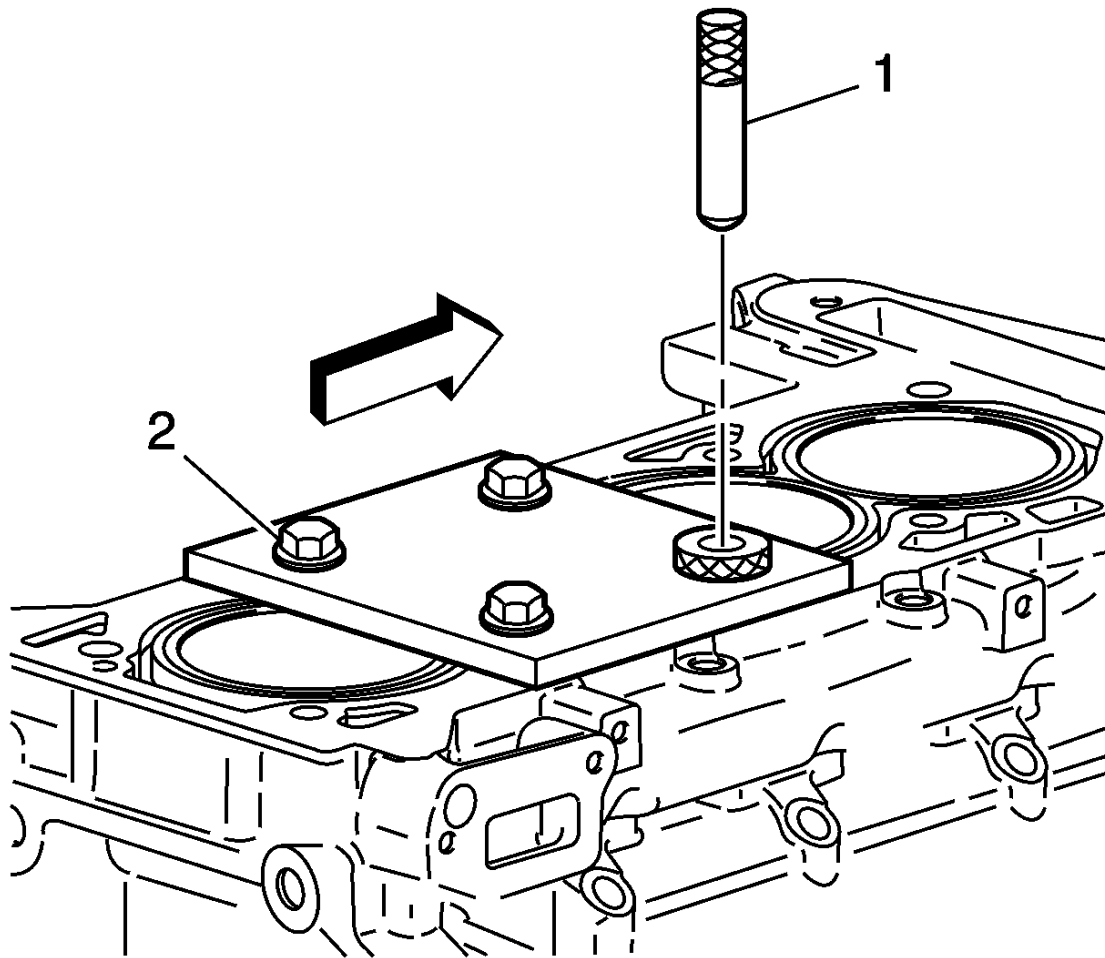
Identifying Alignment Pin & Fixture Retaining Bolts
